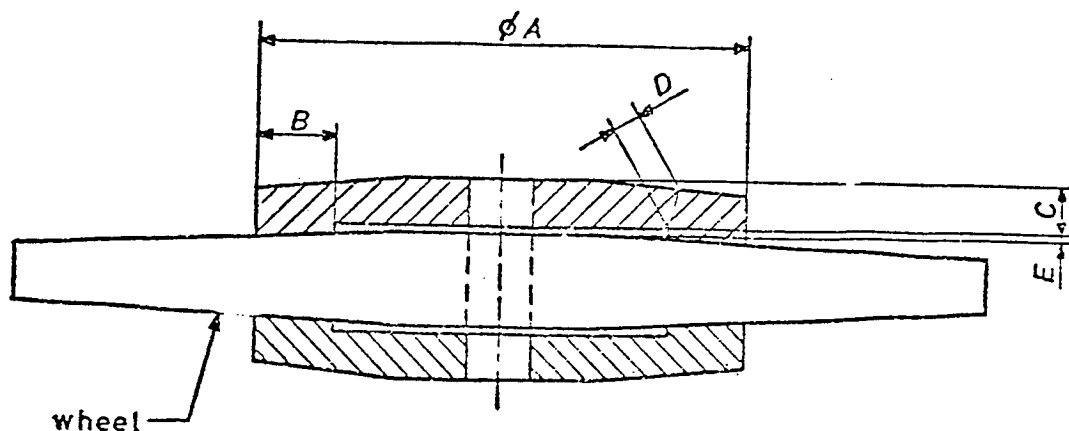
Flanges for taper-sided wheels (for dimensions see table 3)
